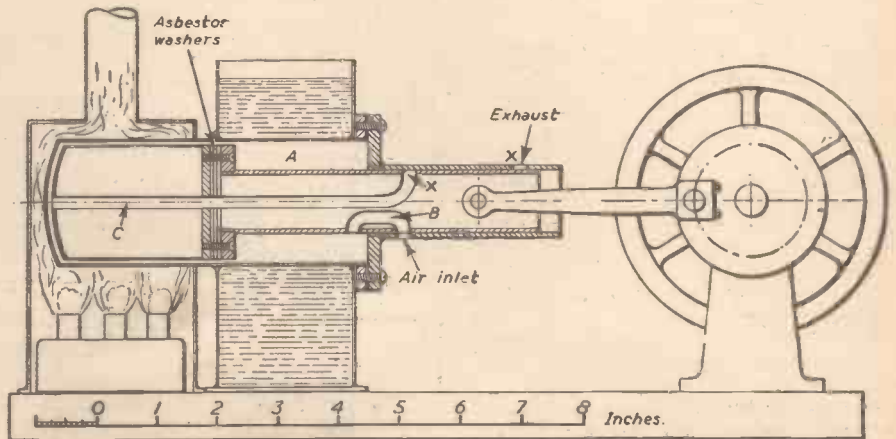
This sectional view of the hot-air engine shows the simplicity of the design.
